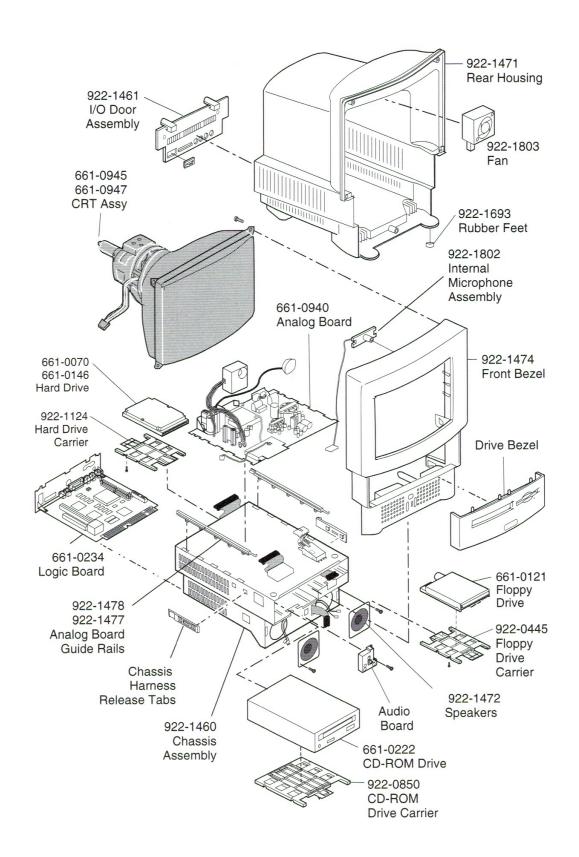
Macintosh LC 580/Performa 580CD Exploded View
